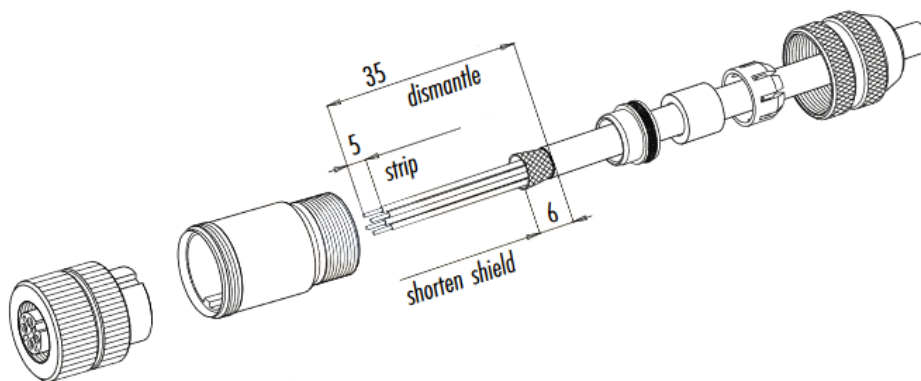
Field-wireable connector, exploded view, dimensions in mm
